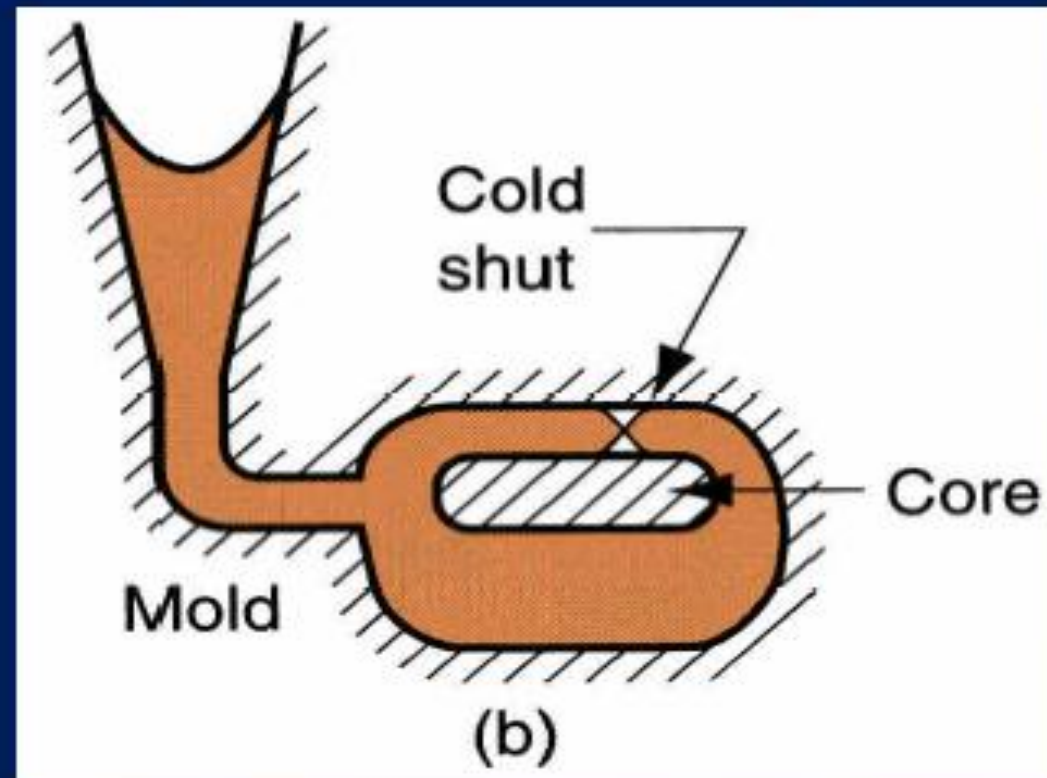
Some common defects in castings: (b) cold shut
